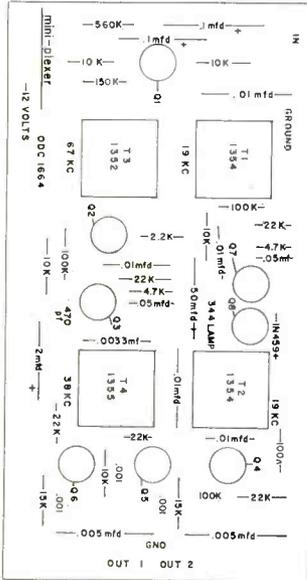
Component side of board shows parts layout. In spite of its miniature size, there is ample space between the components.
